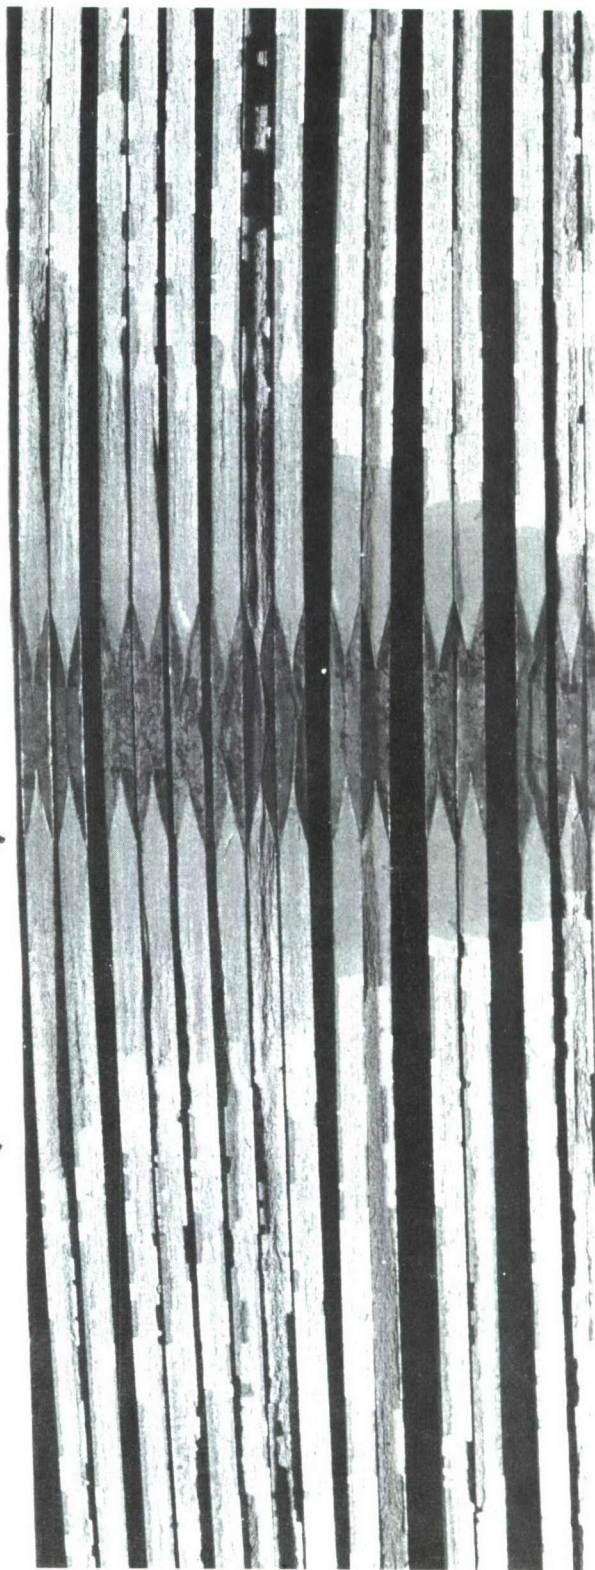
HEAT TINTED FATIGUE CRACKED SURFACES
